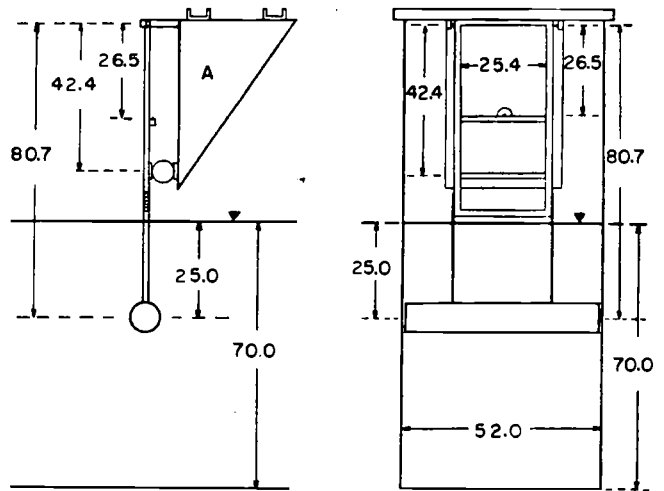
Dynamometer assembly (dimensions in centimeters).
